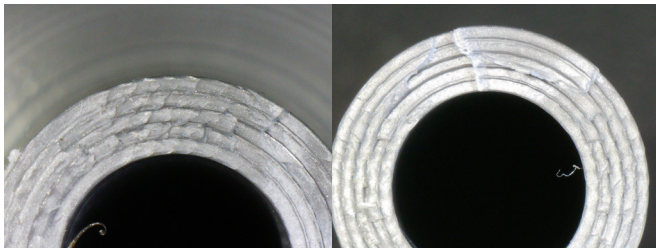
Cross-section mouthpiece ironed w/ 5mm/s
